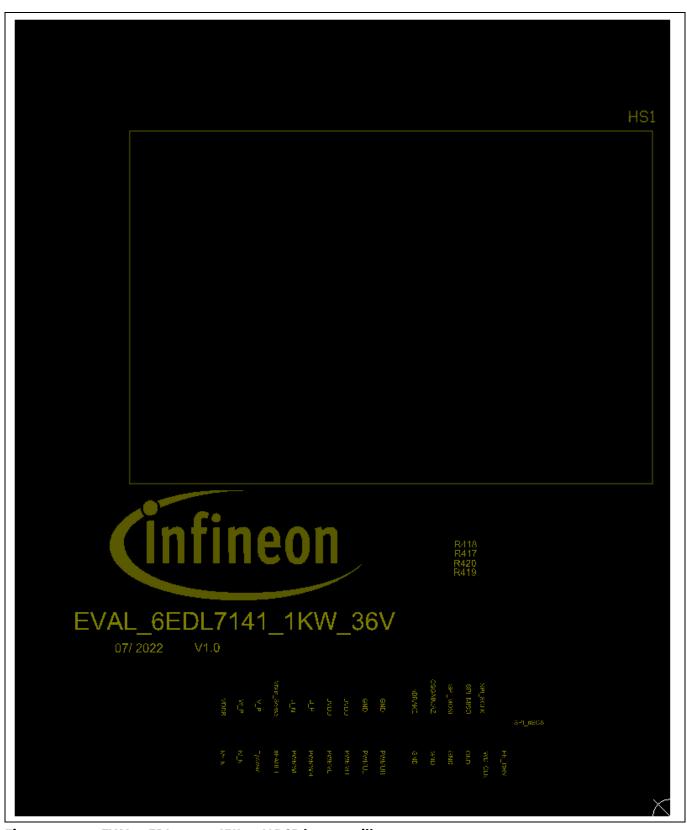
EVAL_6EDL7141_1KW_36V PCB bottom silkscreen
